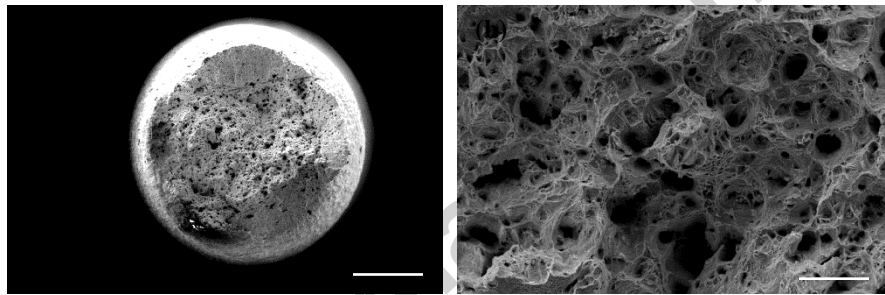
SEM fractographs of a cylindrical testpiece after testing at 750°C: (a) cup and cone fracture surface appearance; and (b) details of the microvoids formed in the center of the testpiece.
